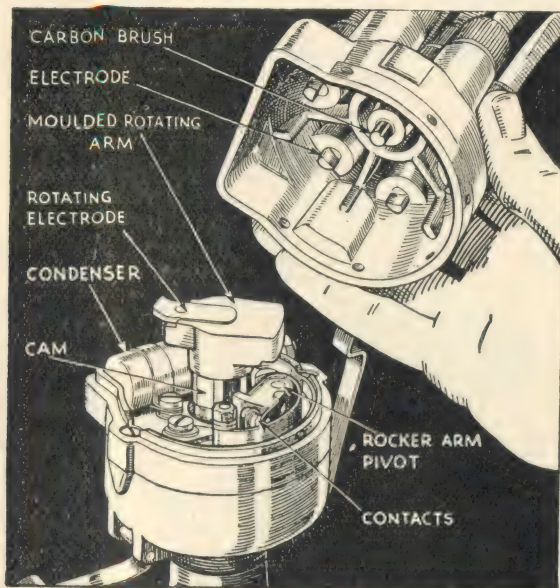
CONTACT-BREAKER AND DISTRIBUTOR UNIT
